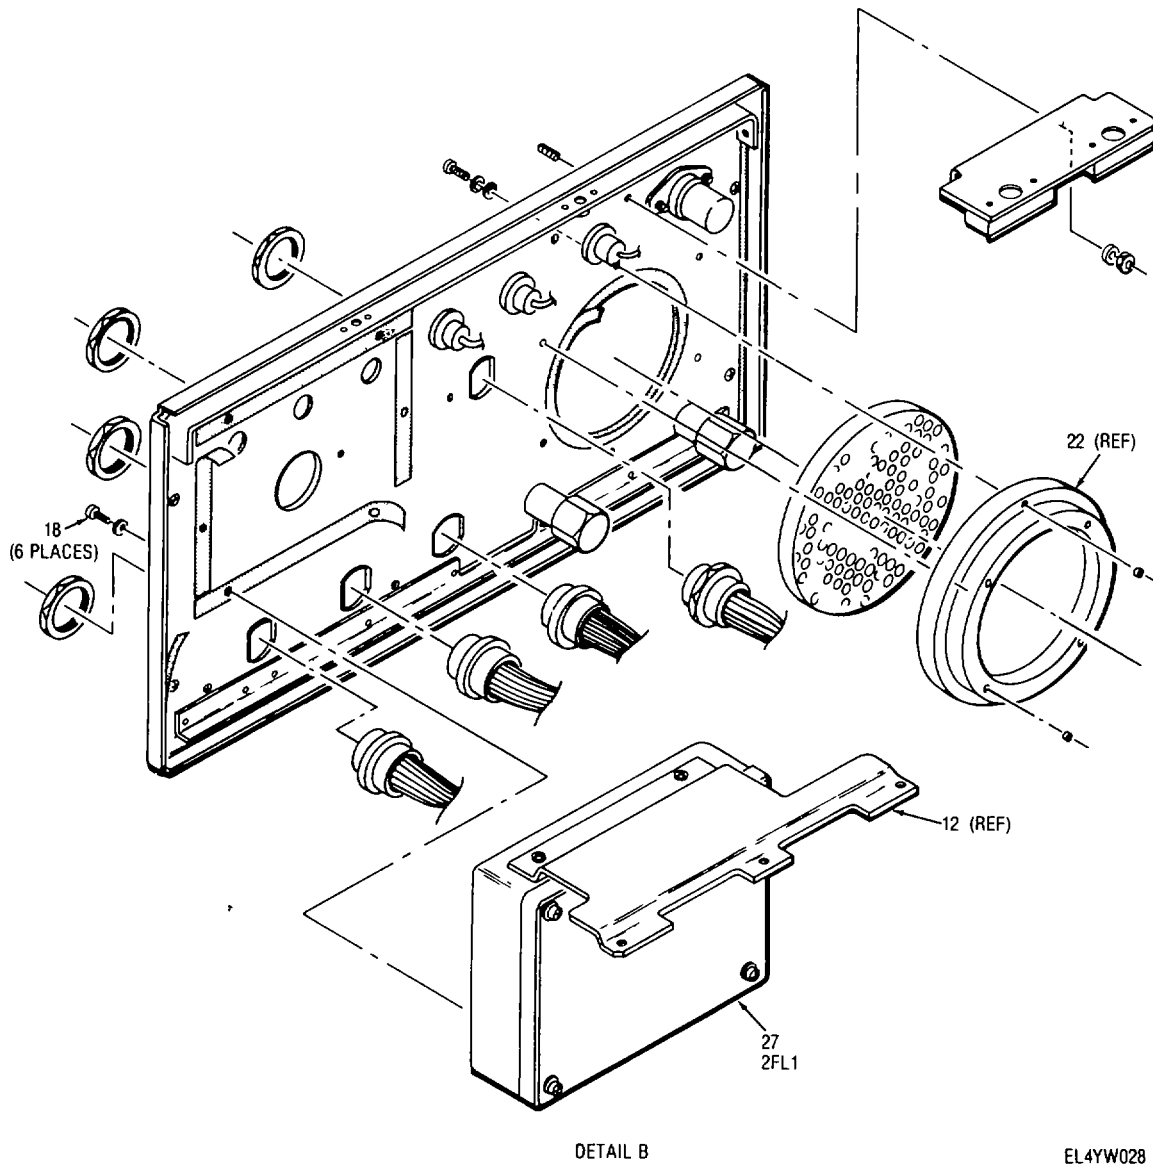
Encoder exploded view (sheet 7 of 8).
